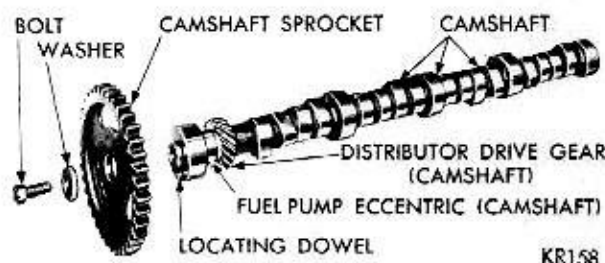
Camshaft and Sprocket Assembly (Disassembled View)
